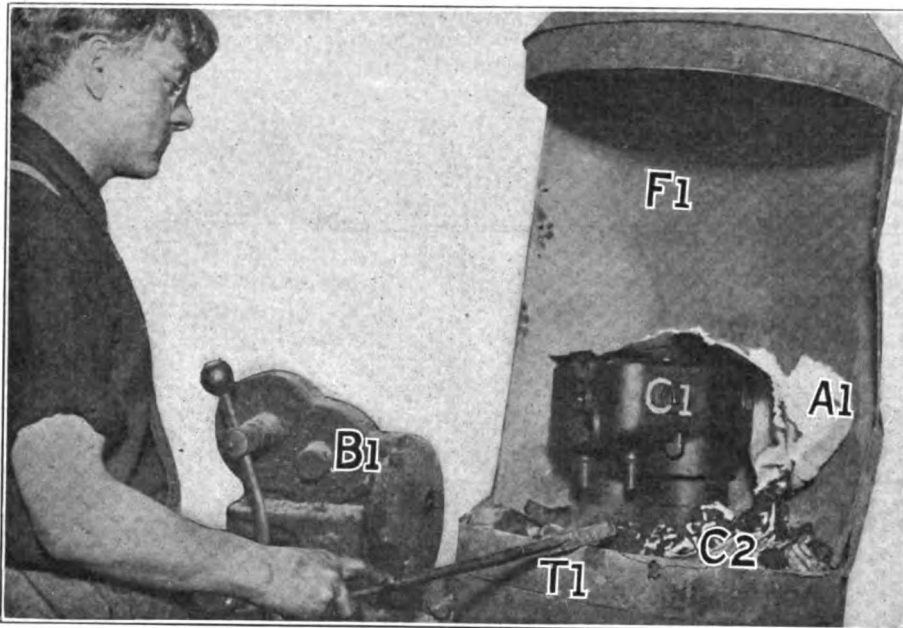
Cylinders placed in blast forge and covered with asbestos, to be heated before welding
